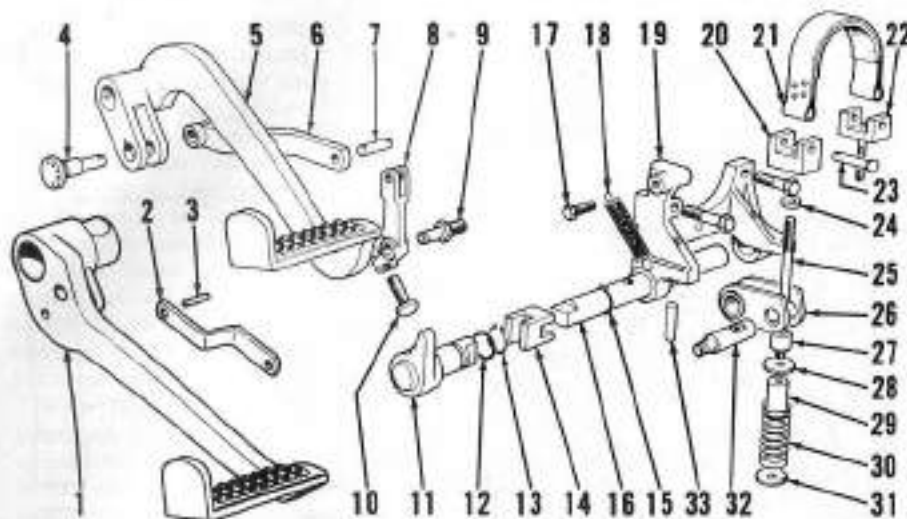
Exploded view of clutch stop (clutch shaft brake) components and actuating linkage typical of all models except model 1200; refer to Figs. 101 and 102 for model 1200 clutch stop. Two clutch pedals are shown; models 780 and 3800 use pedal (1); models 880, 990 and 4600 are fitted with pedal (5).
